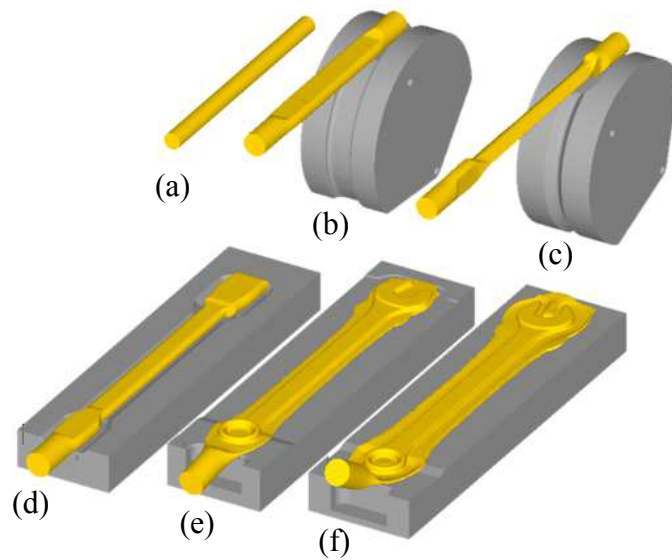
Simulation workpiece model results at the end of each operation, for the initial proposed wrench forging process. (a) Starting billet and (b) Roll forming – 1st pass, (c) Roll forming – 2nd pass, (d) Edger (e) Blocker (f) Finisher operation
